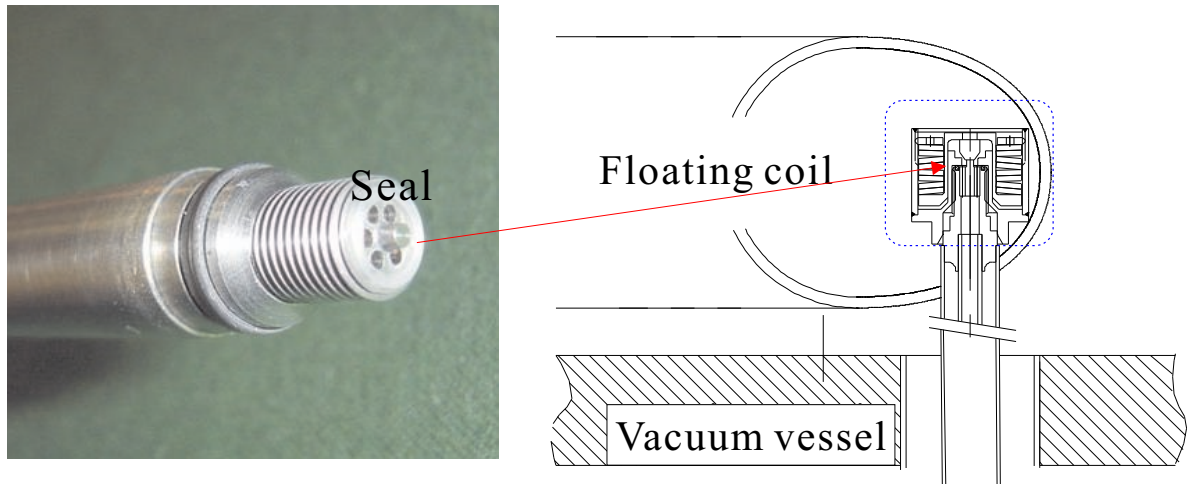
Detachable Transfer Tube;The Head of Transfer Tube (left), Cross Section of Check Valve (right)
